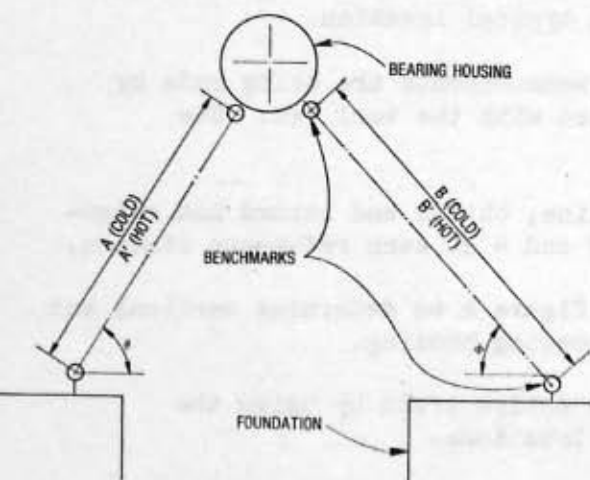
Typical placement of benchmarks on foundation and bearing housing.
